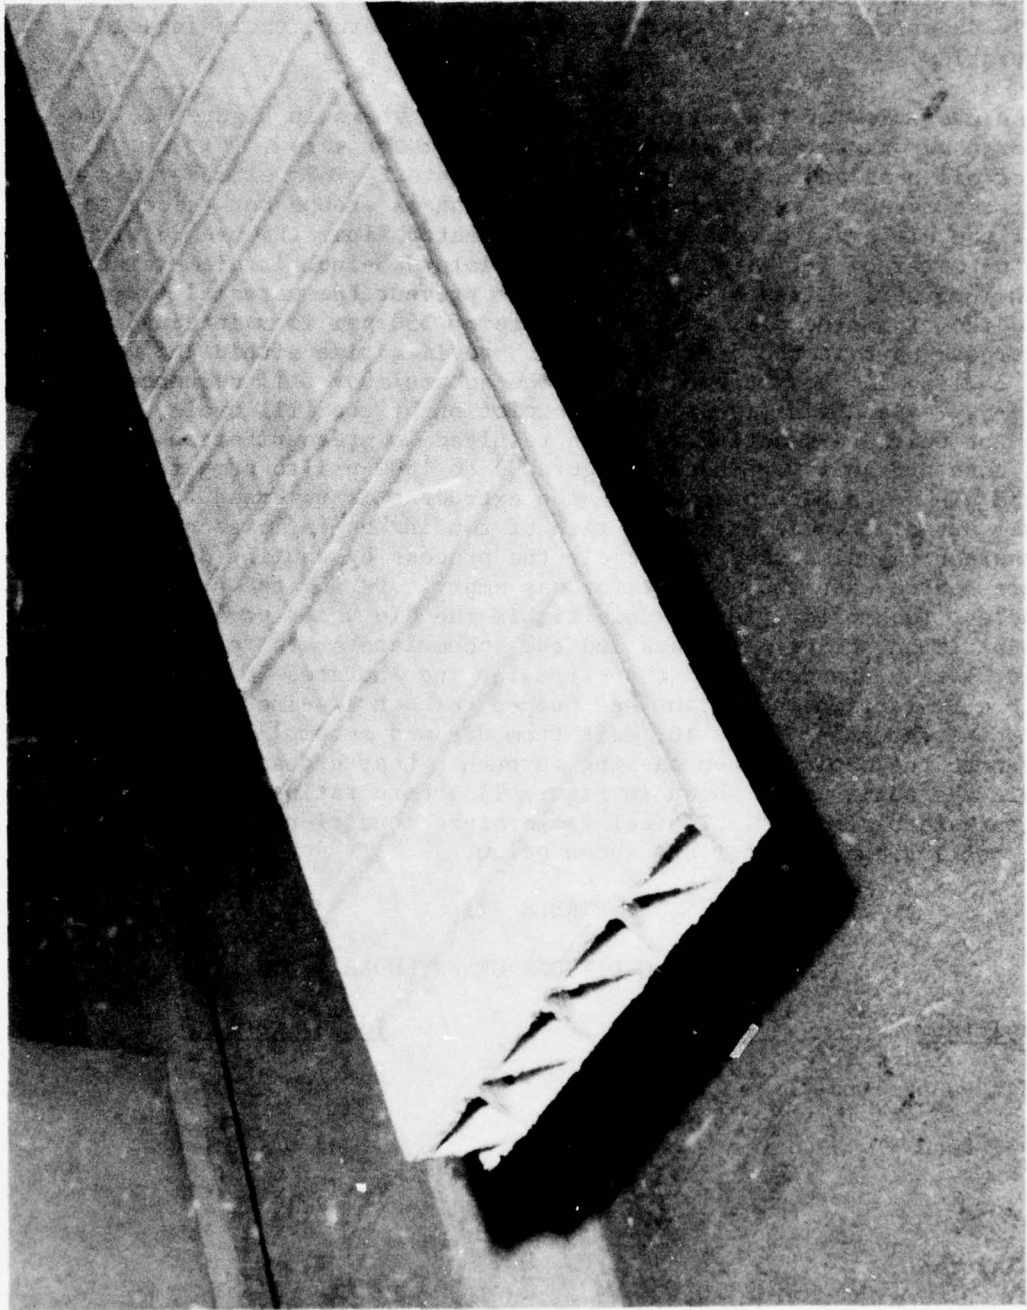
Hot-Cold Weld Line in Truss Design
